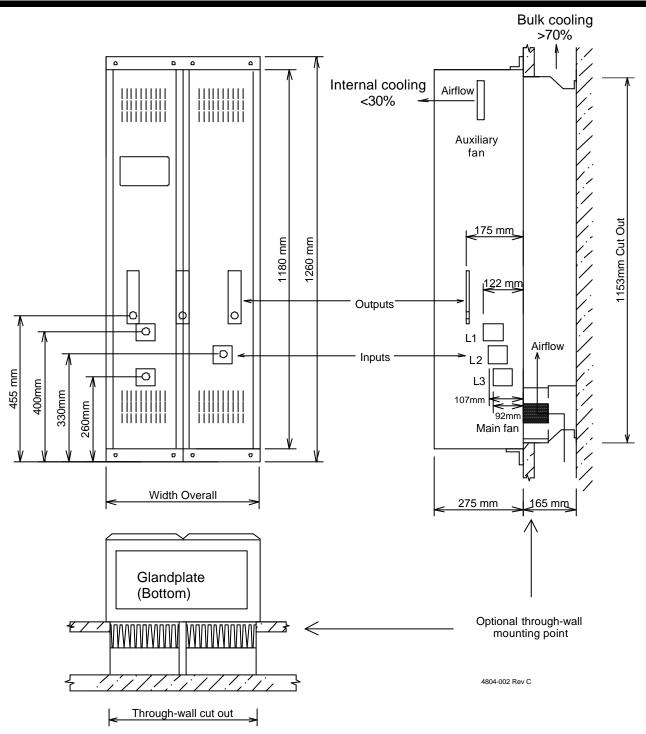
Dimensional Details - Microdrive V 170-900A Series.
